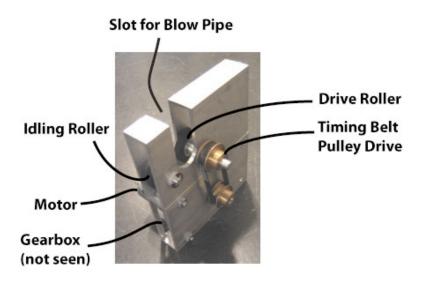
DC motor and drive assembly shown upside down for a better view of the components.
